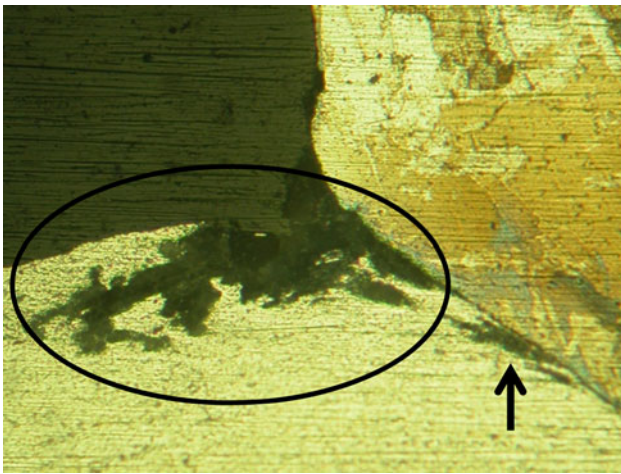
Corrosion close to kissing bond defect, the stringer is the brighter part on the bottom side
